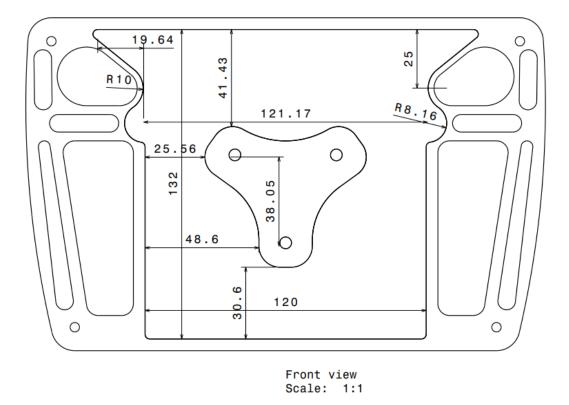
Mechanical drawing of the steering wheel bottom plate.
